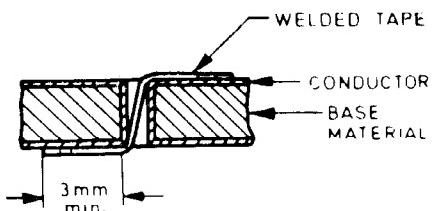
DEFECTIVE PLATED THROUGH HOLES — PARALLEL GAP WELDING METHOD 1
